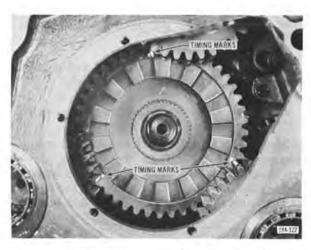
Aligning O-Marks on Lo-Range Gear with Countershaft Gears
